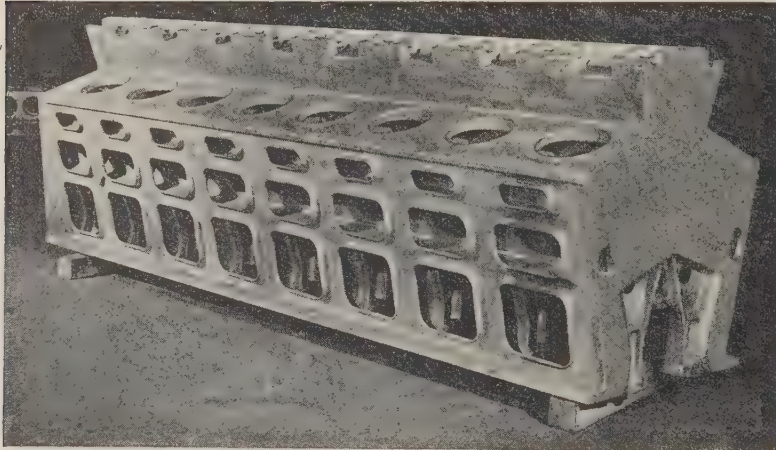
16-CYLINDER, V-TYPE, WELDED DIESEL-ENGINE FRAME
